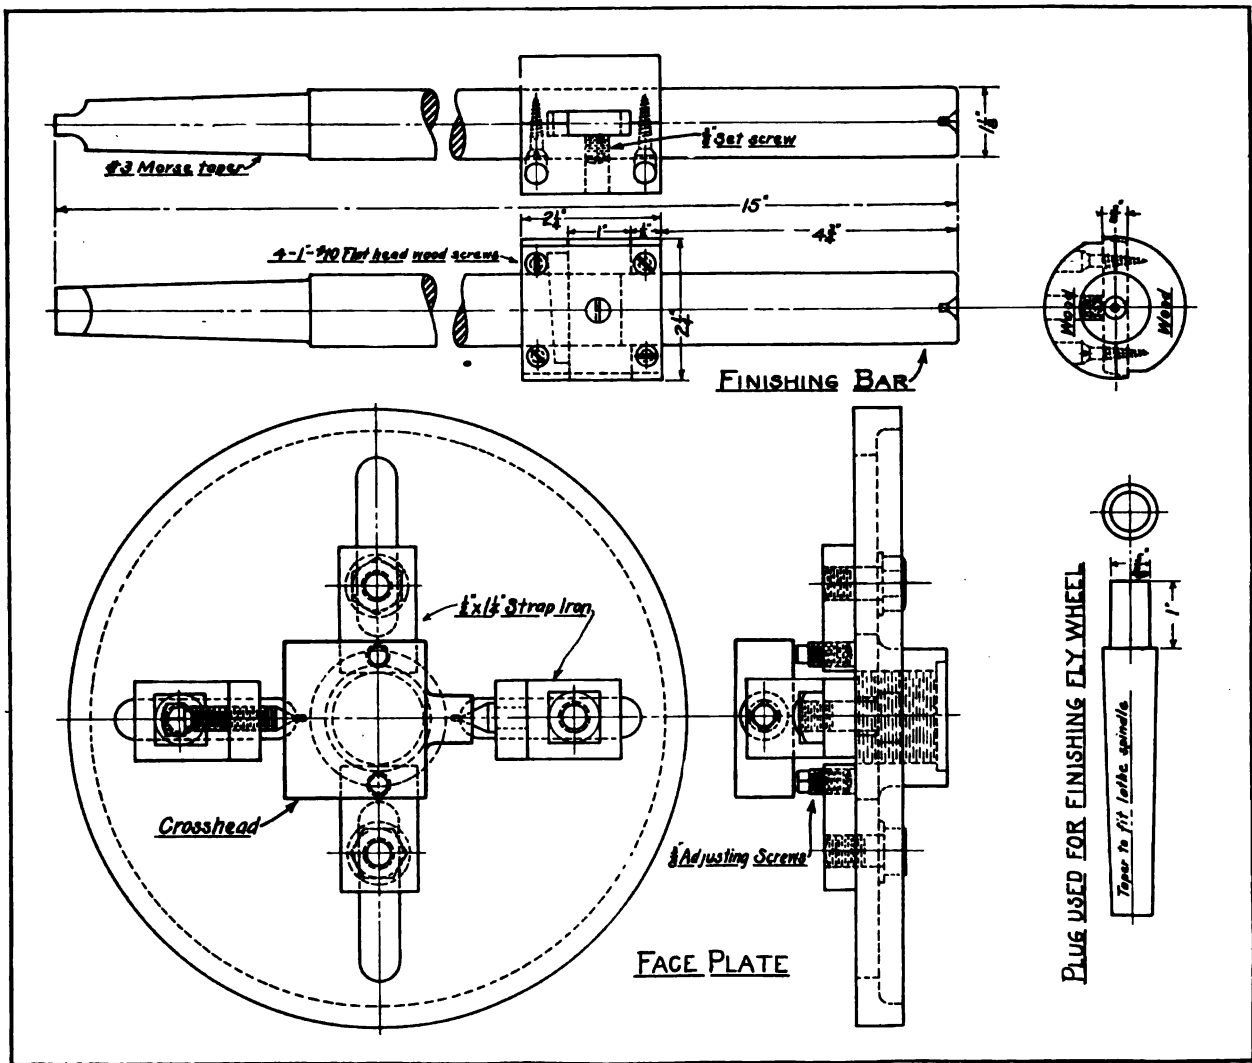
SPECIAL TOOLS USED IN BUILDING THE ENGINE.
